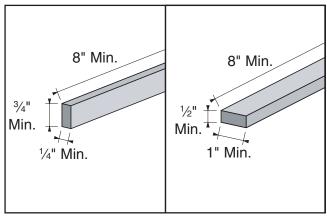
Minimum dimensions for edge jointing and surface planing (jointer).
